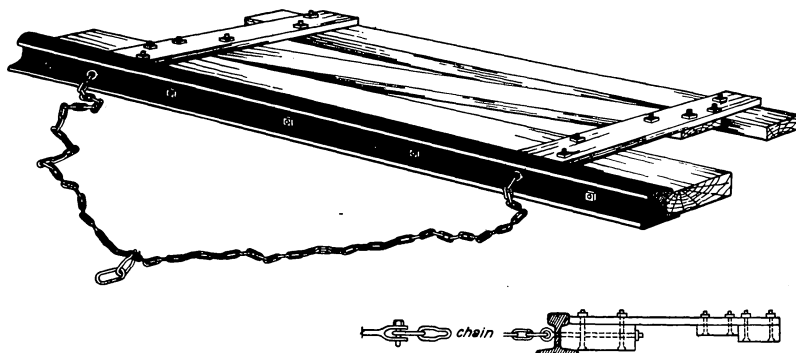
A 10- to 15-foot section of a 90-pound railroad rail adapted to break down heavy sagebrush.
